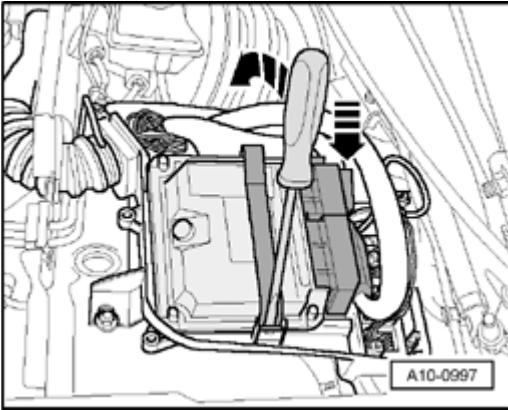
Using Screwdriver To Remove Retainer Bar And Engine Control Module (ECM) J623
